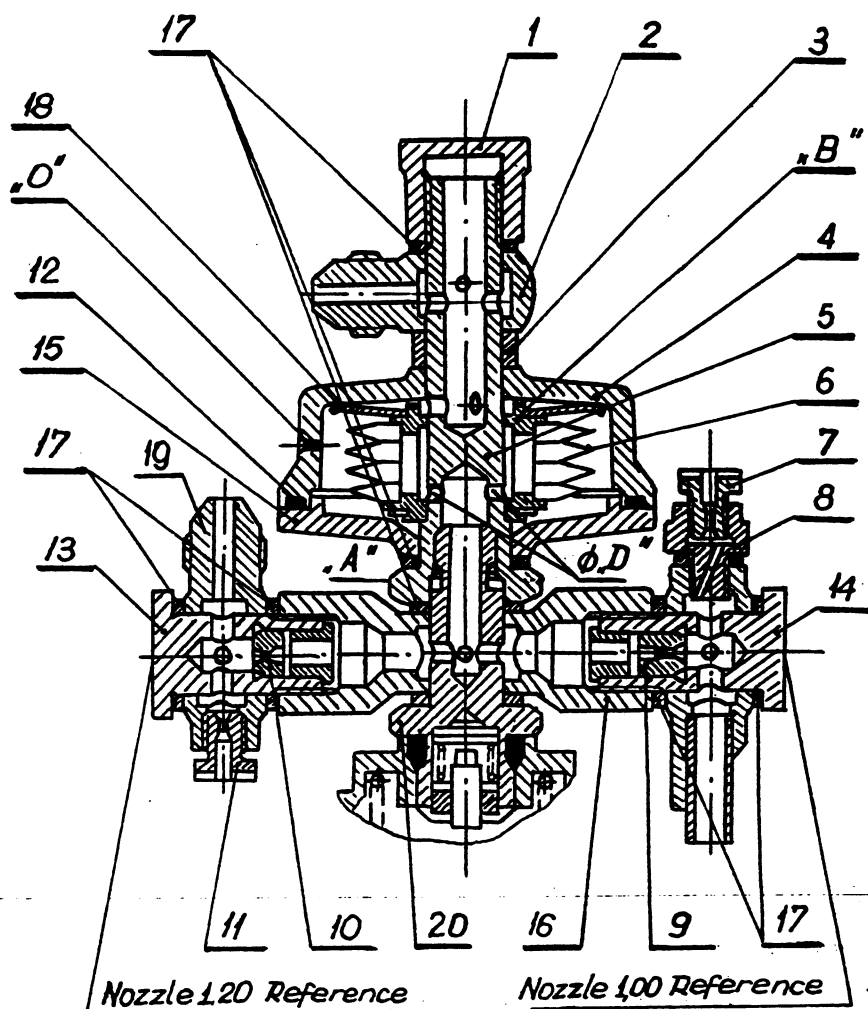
Combined set of fuel pump air filter and nozzles /Series II, III and IV Engines/
